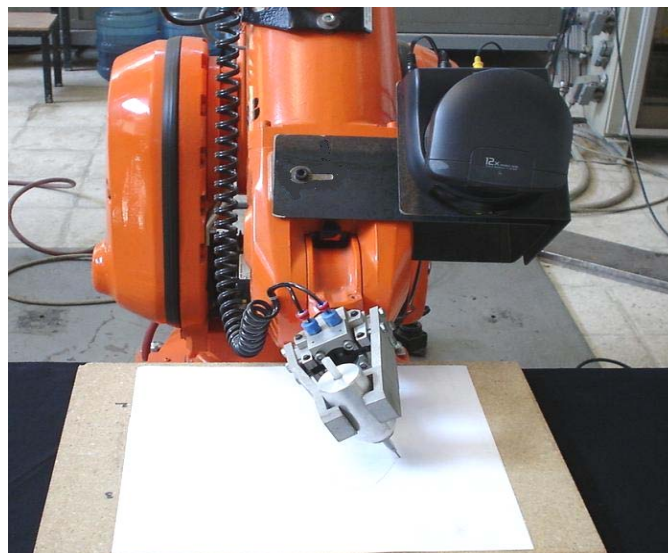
Pen Holder and Gripper Mounted to the Robot
